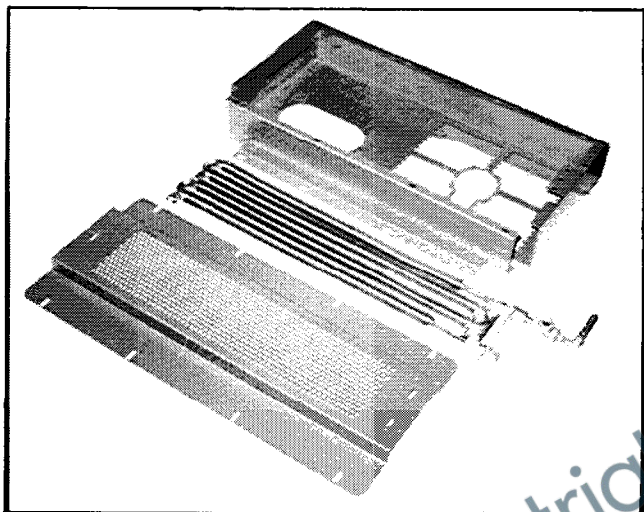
Typical Air-Cooled Aftercooler with Belt Guard. (Disassembled)
